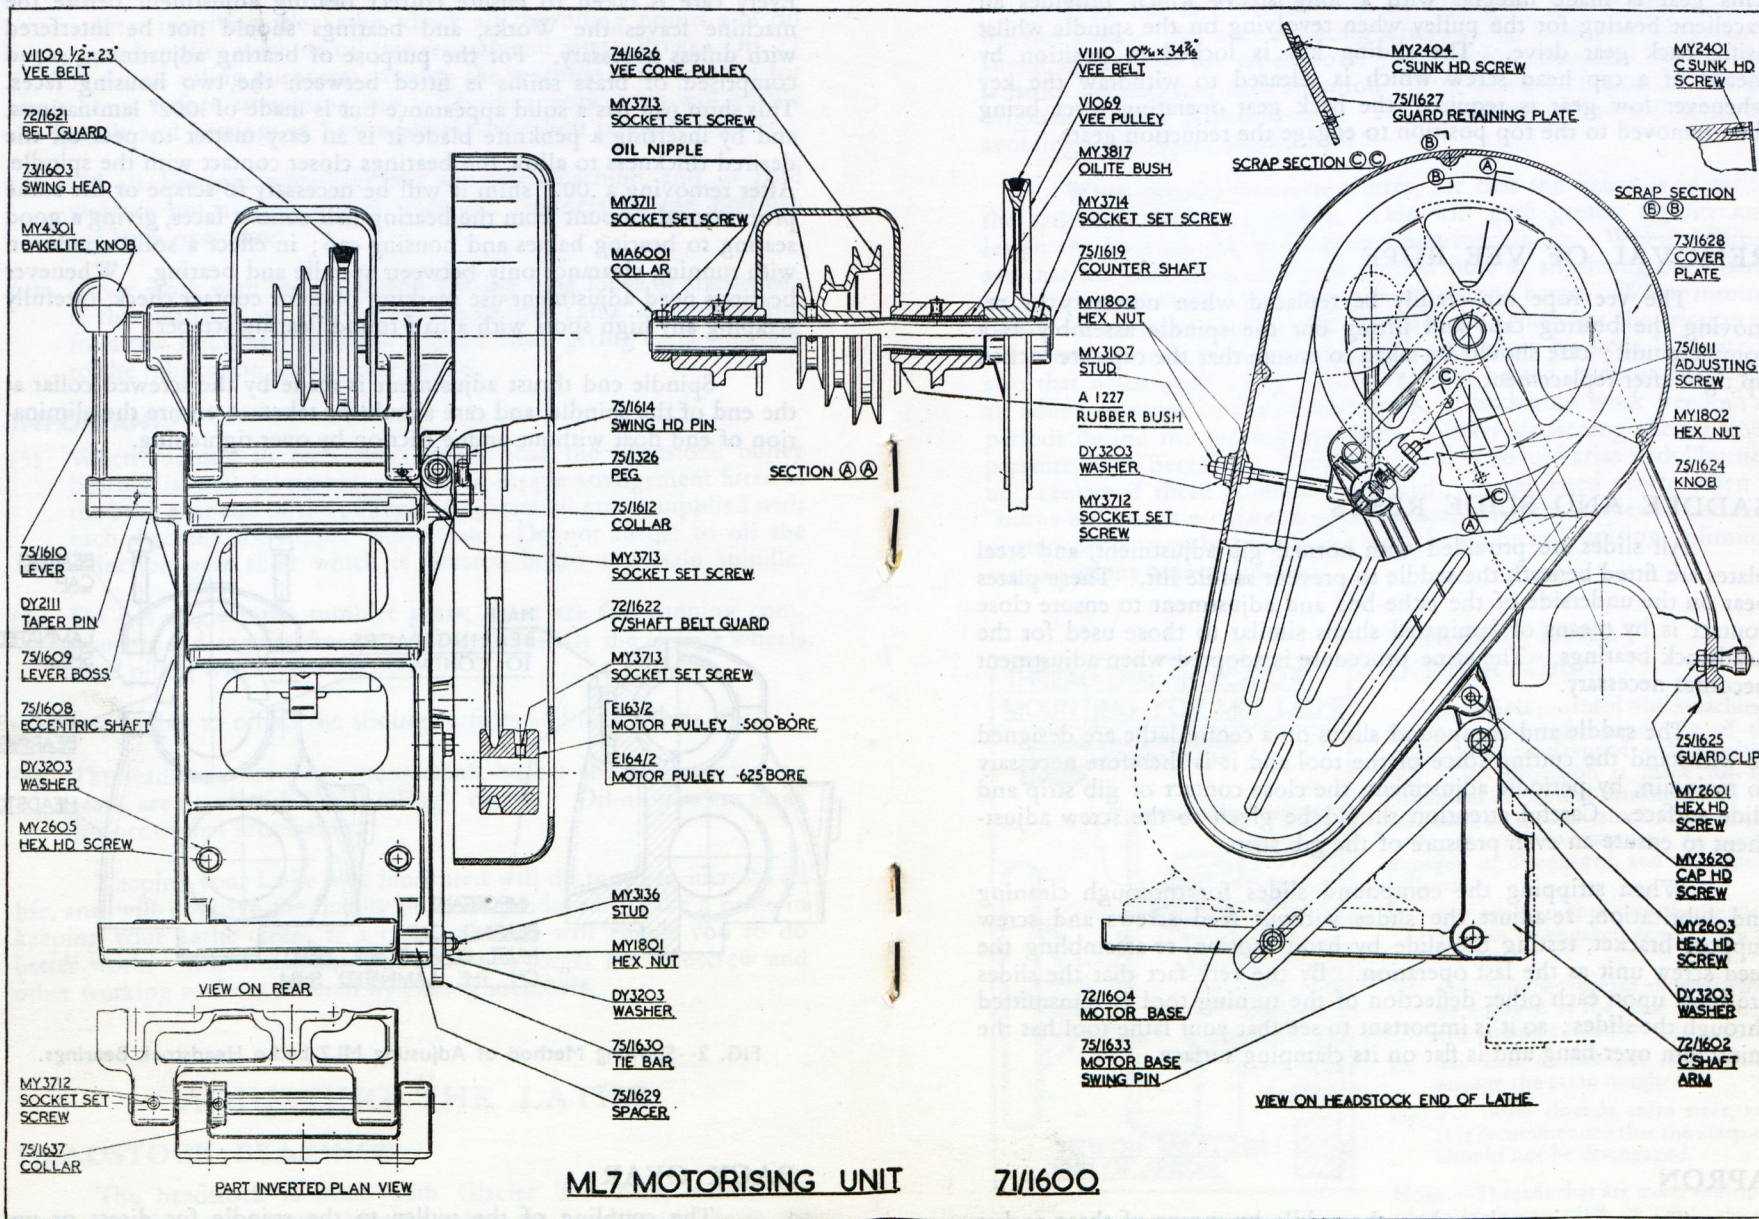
Showing the construction of the ML7 Lathe Motorising Unit.
